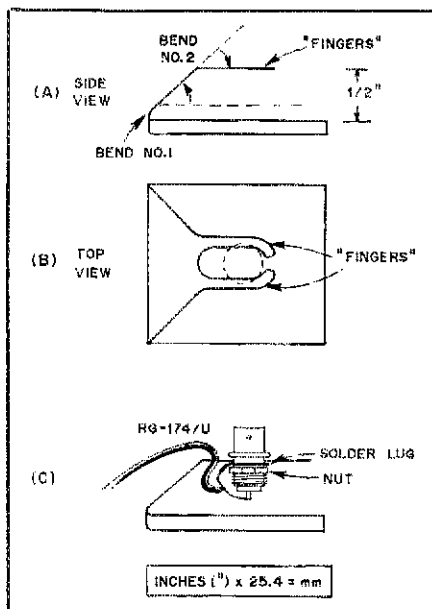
(A) Details showing how the mike holder is bent to form the base of the pocket mag mount. (B) Top view, showing the mike-holder fingers bent to hold the BNC connector. (C) Final assembly of the pocket mag mount.
